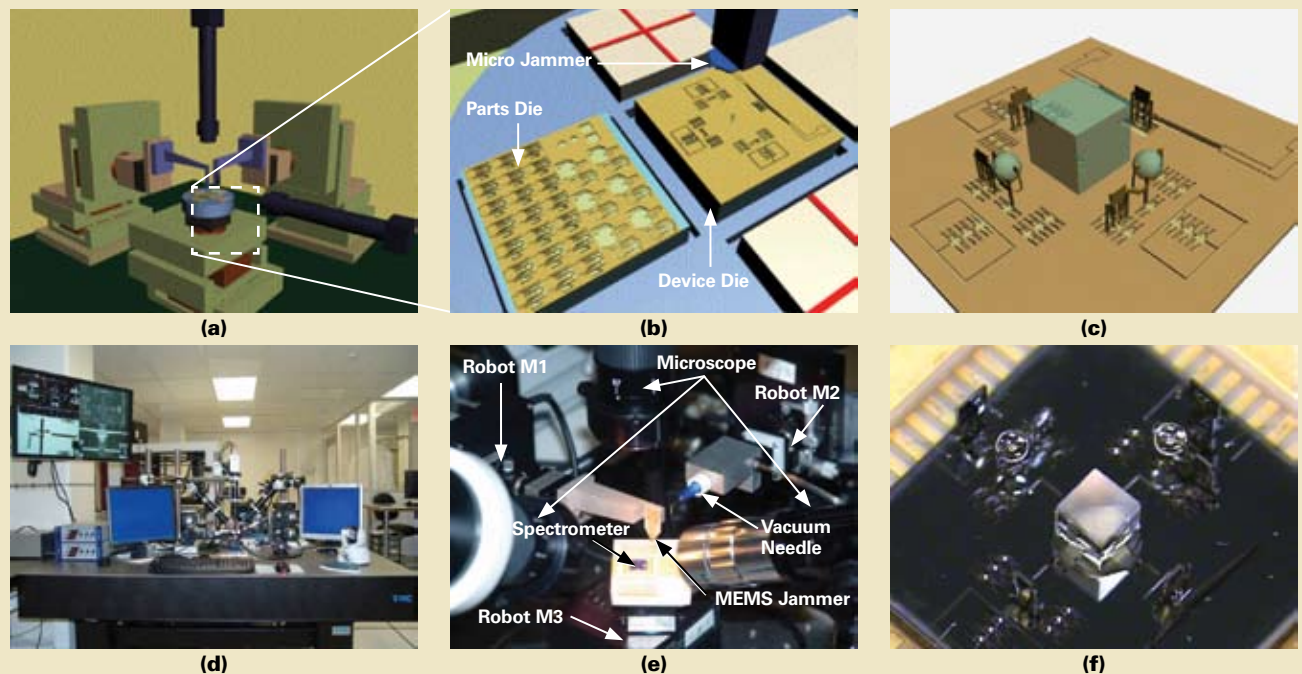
Assembly configuration of microspectrometer; (a) virtual μ^3 robotic assembly setup (b) close-up view of the micropart (mirrors, grippers, lens holders) and device dies, (c) assembled MEMS parts and off-the-shelf optical components on the spectrometer substrate. (d) - (f) μ^3 assembly cell for actual 1cm x 1cm spectrometer die in class 10,000 cleanroom.
